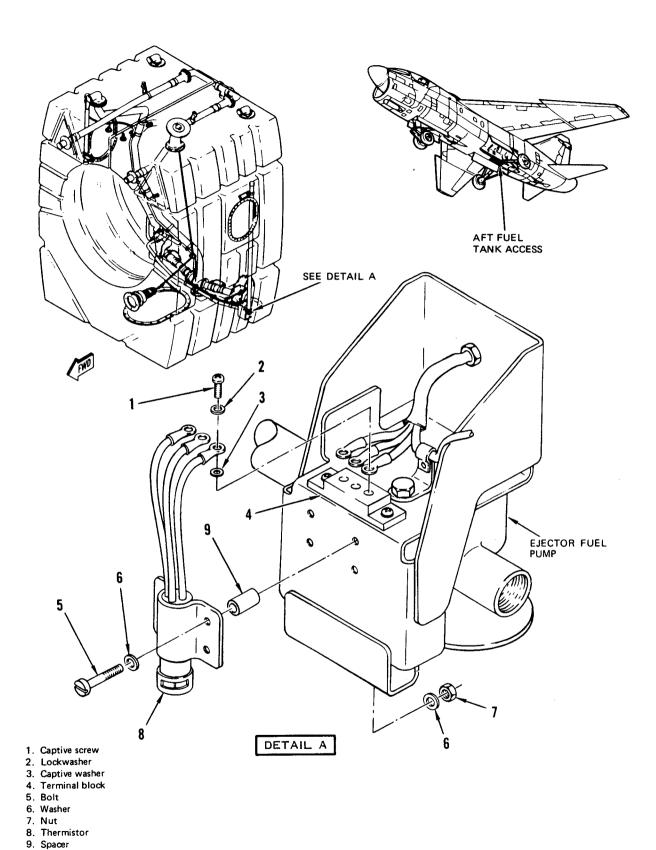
Removal and Installation; Fuel Transfer Control Thermistor No. 2
